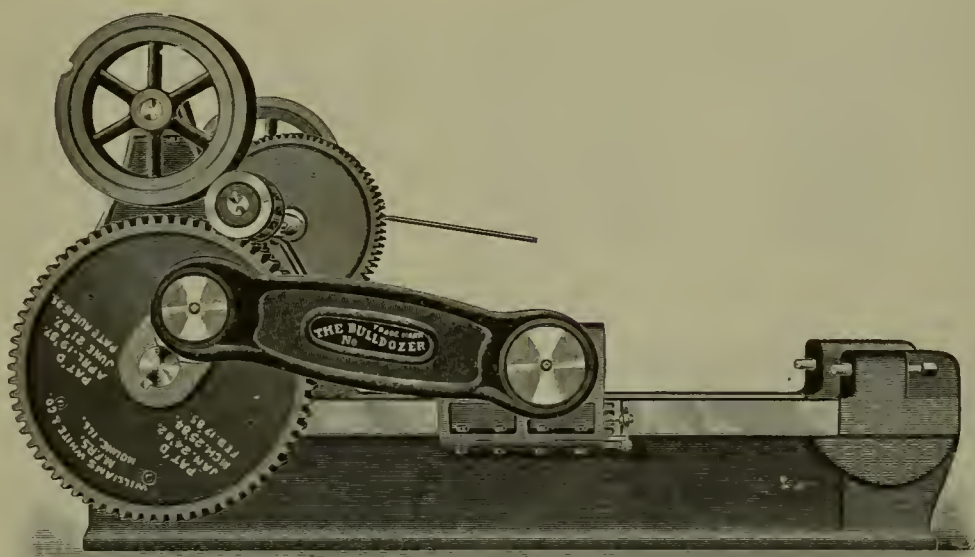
BULLDOZING MACHINE MANUFACTURED BY WILLIAMS, WHITE & CO.
